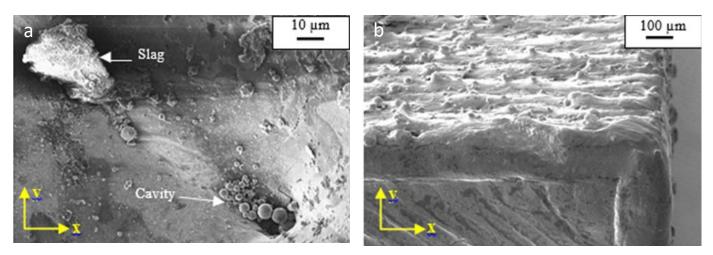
a) Common surface deformities such as slag, shrinkage hole, microcrack on xy view b) Poor surface quality due to incomplete welded powder and imperfect layers from z axis view³⁸⁾
